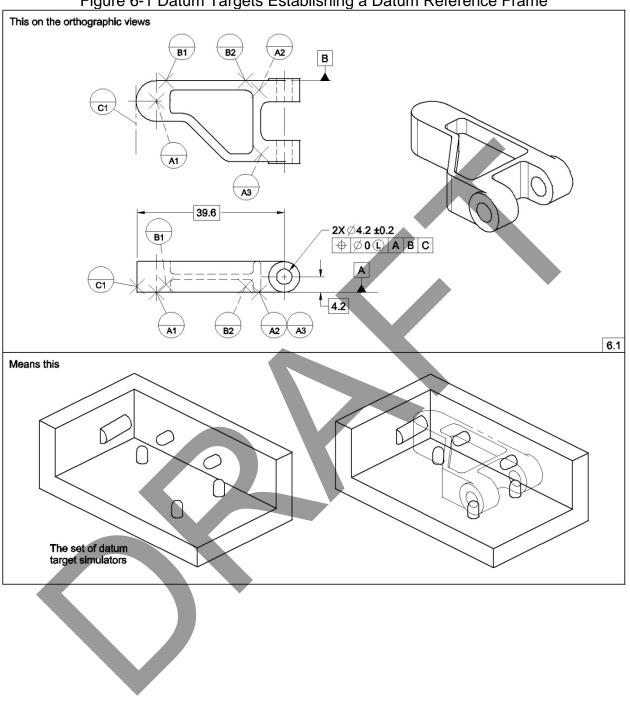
Datum Targets Establishing a Datum Reference Frame
